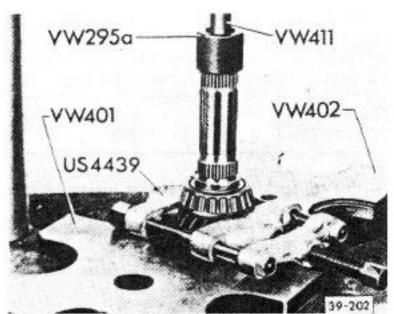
Bearing/pinion shaft, removing bearing cannot be reused after removal
